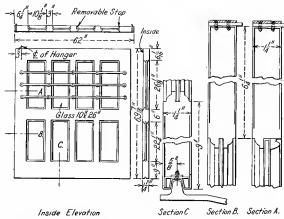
Steel Side Door and Details for Baggage Car. Dahlstrom Metallic Door Company.
